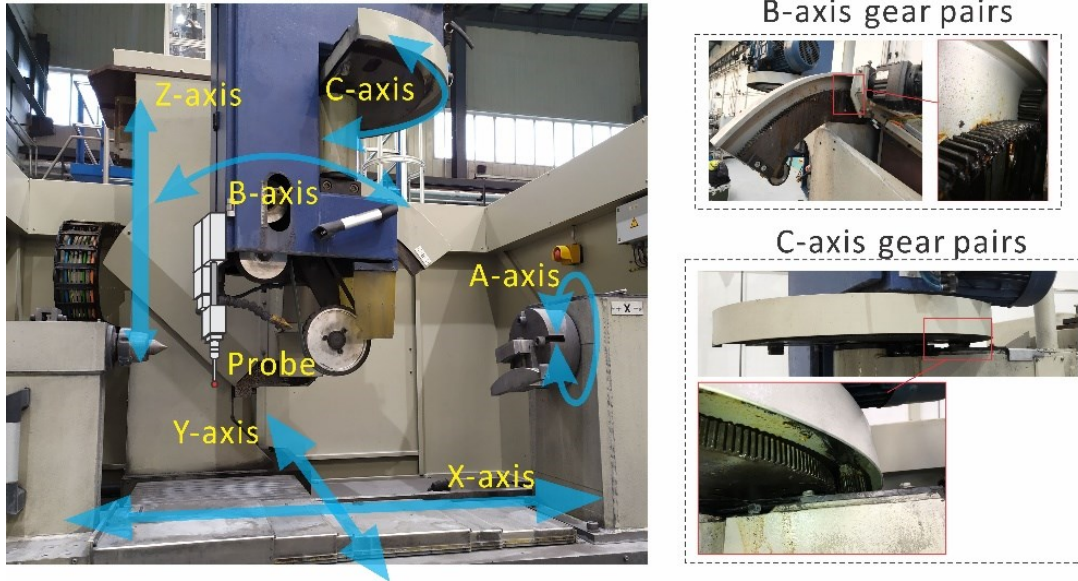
The machine structure of the belt grinding machine and the gear pairs of the B-axis and the C-axis
